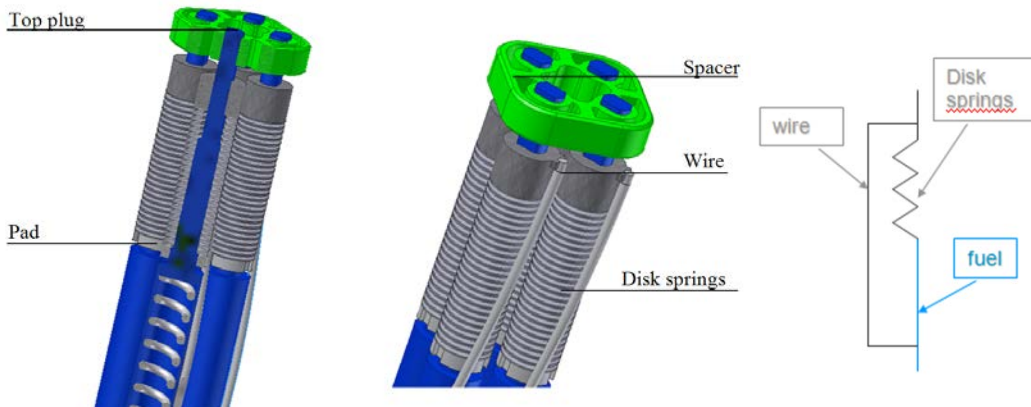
Top part of the fuel assembly with disc springs and sketch of the compensation mechanism (right).
